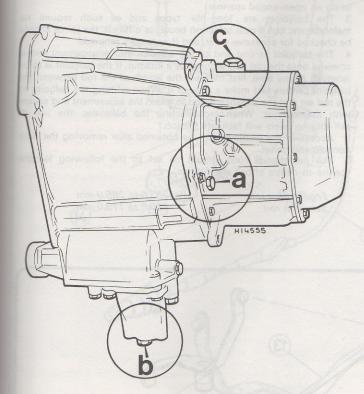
Oil drain and filler plug positions - early 1986 models (Sec 2)
